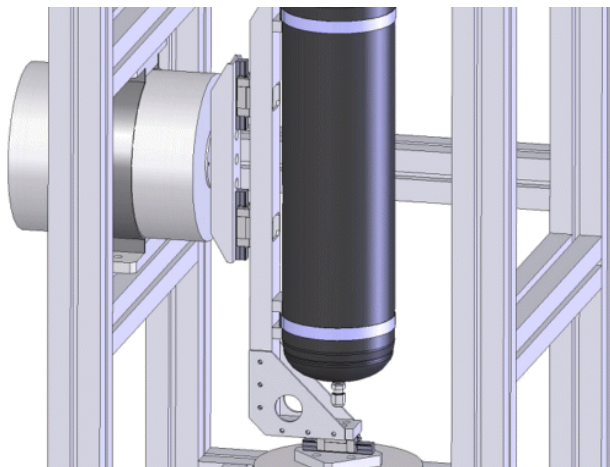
Solid model of shaker assembly with linear roller bearings and vessel support for independent biaxial vibration.
